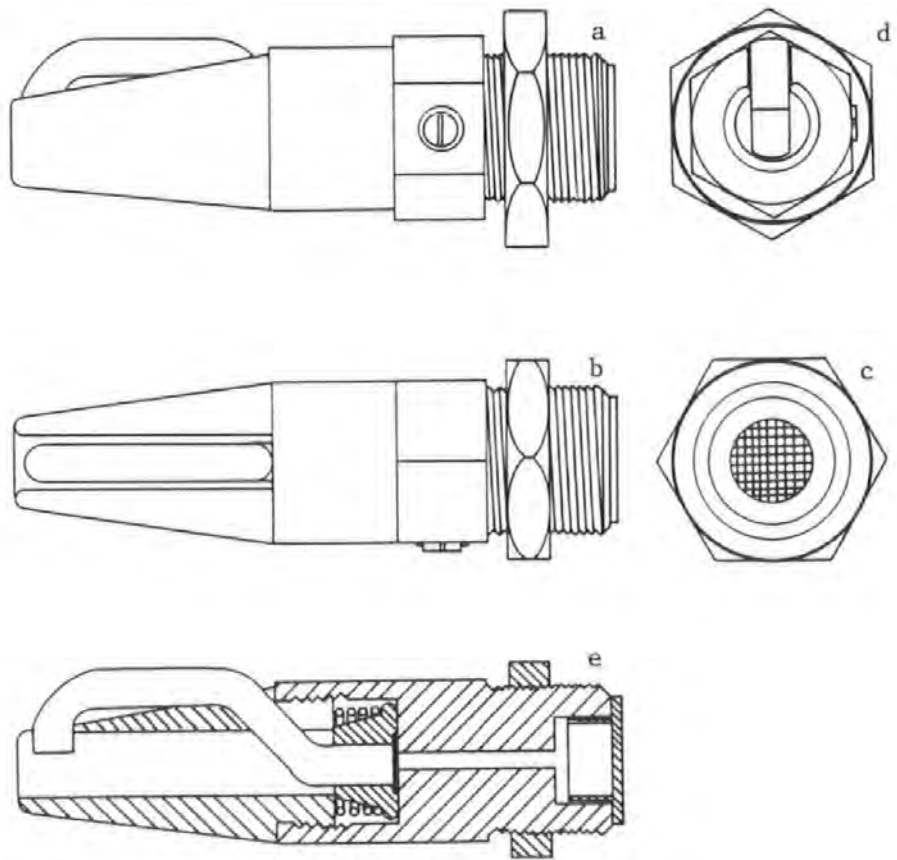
Lubing¹ type I bite drinker. (a) Side elevation; (b) top elevation; (c) end elevation; (d) front elevation; (e) cross section (drawn to full scale).
